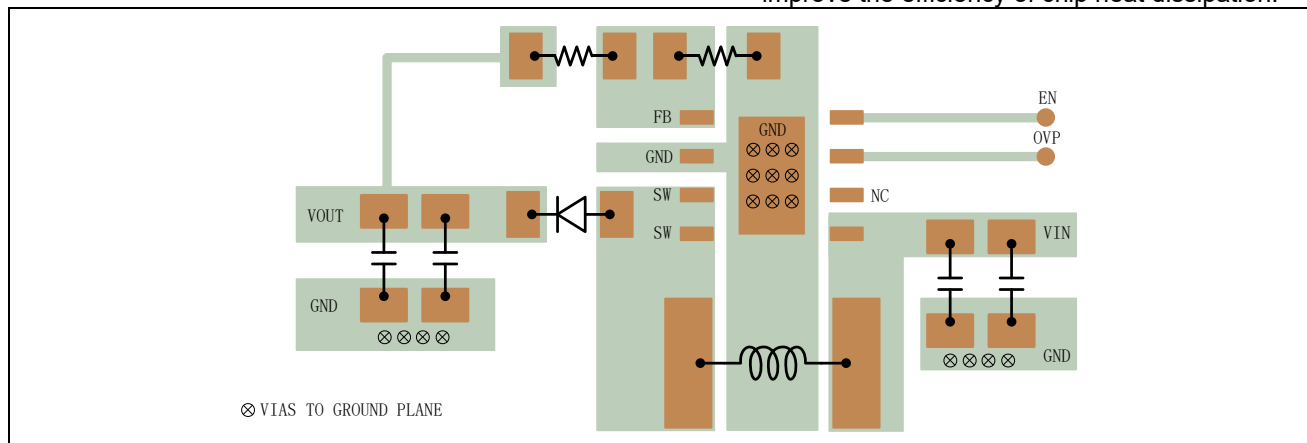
Recommended Circuit ESOP8 Package PCB Layout Example
